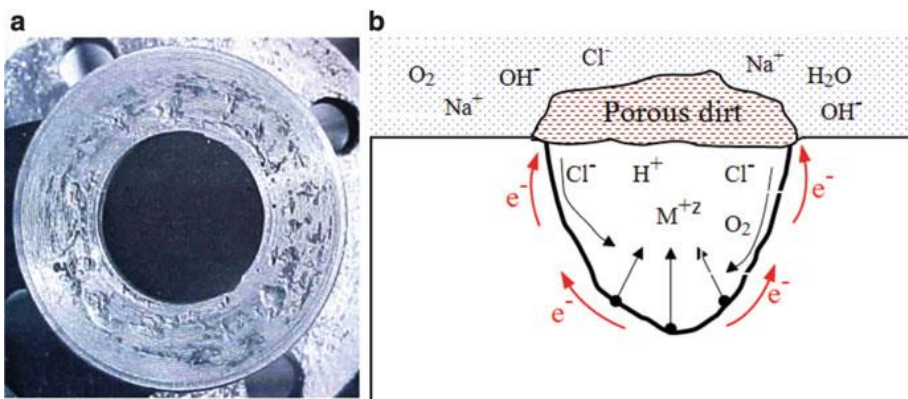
(a) Stainless steel flange exhibiting crevice corrosion-related deterioration signs. (b) Crevice corrosion mechanism.
